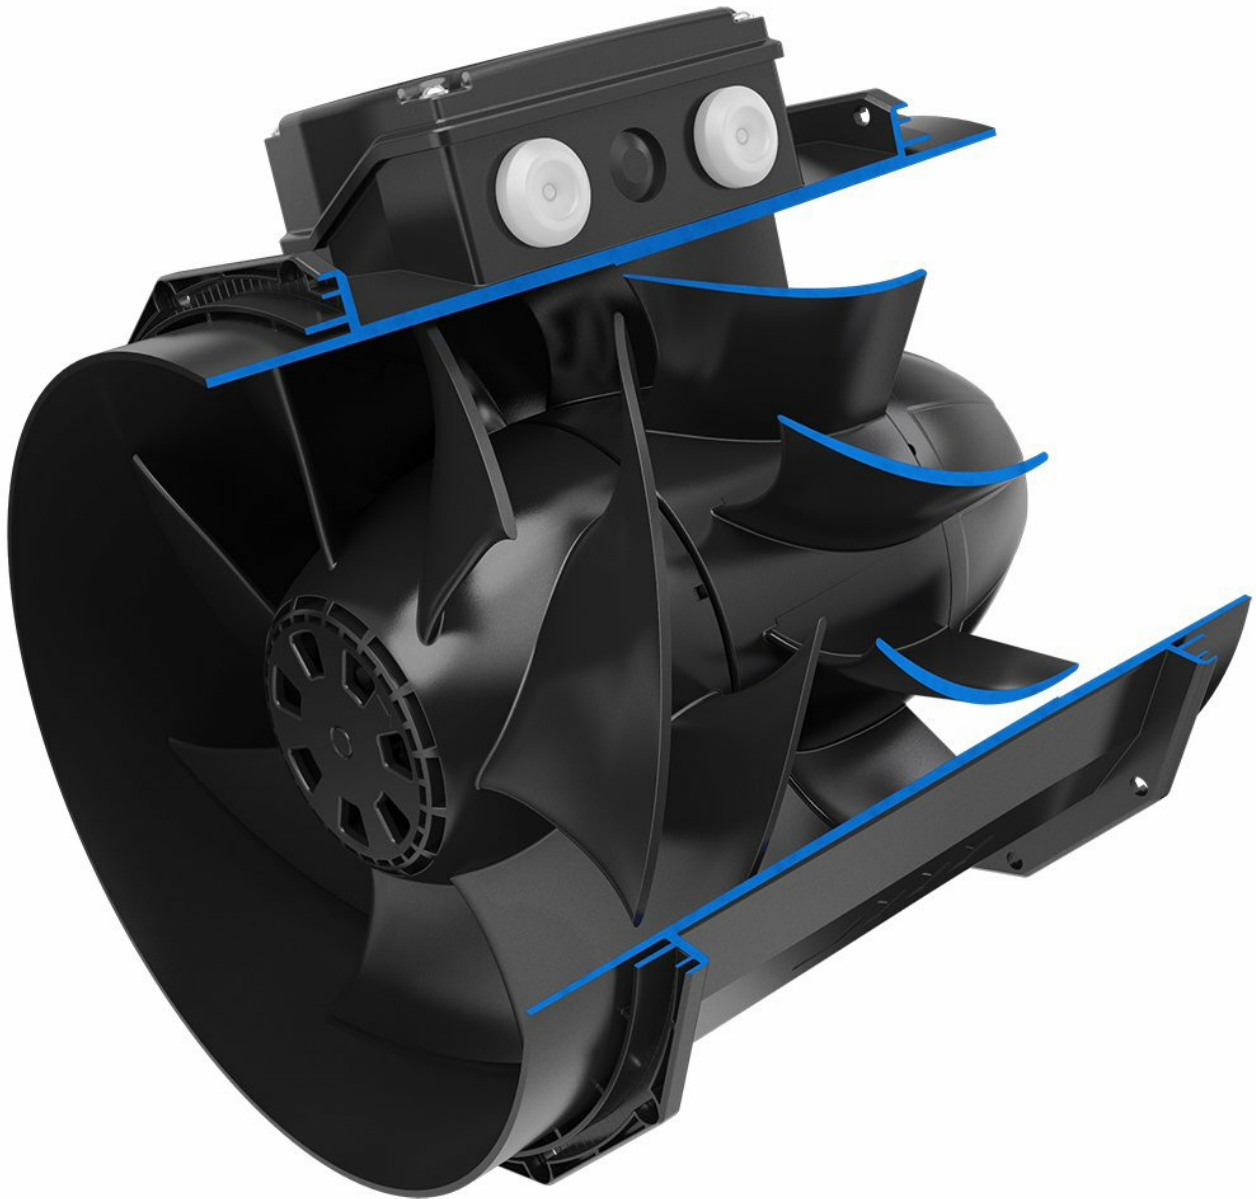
Exploded view illustrating the internal structure and location of the electrical connection box.
